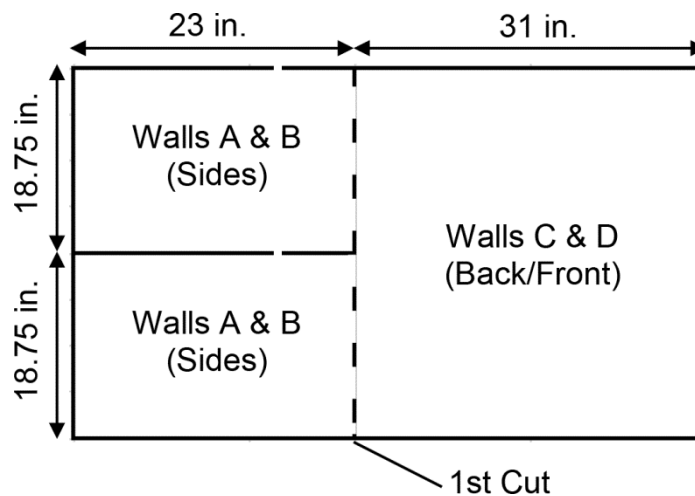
140- and 190-Gallon Tank Rubber Sheet 2 Dimensions
